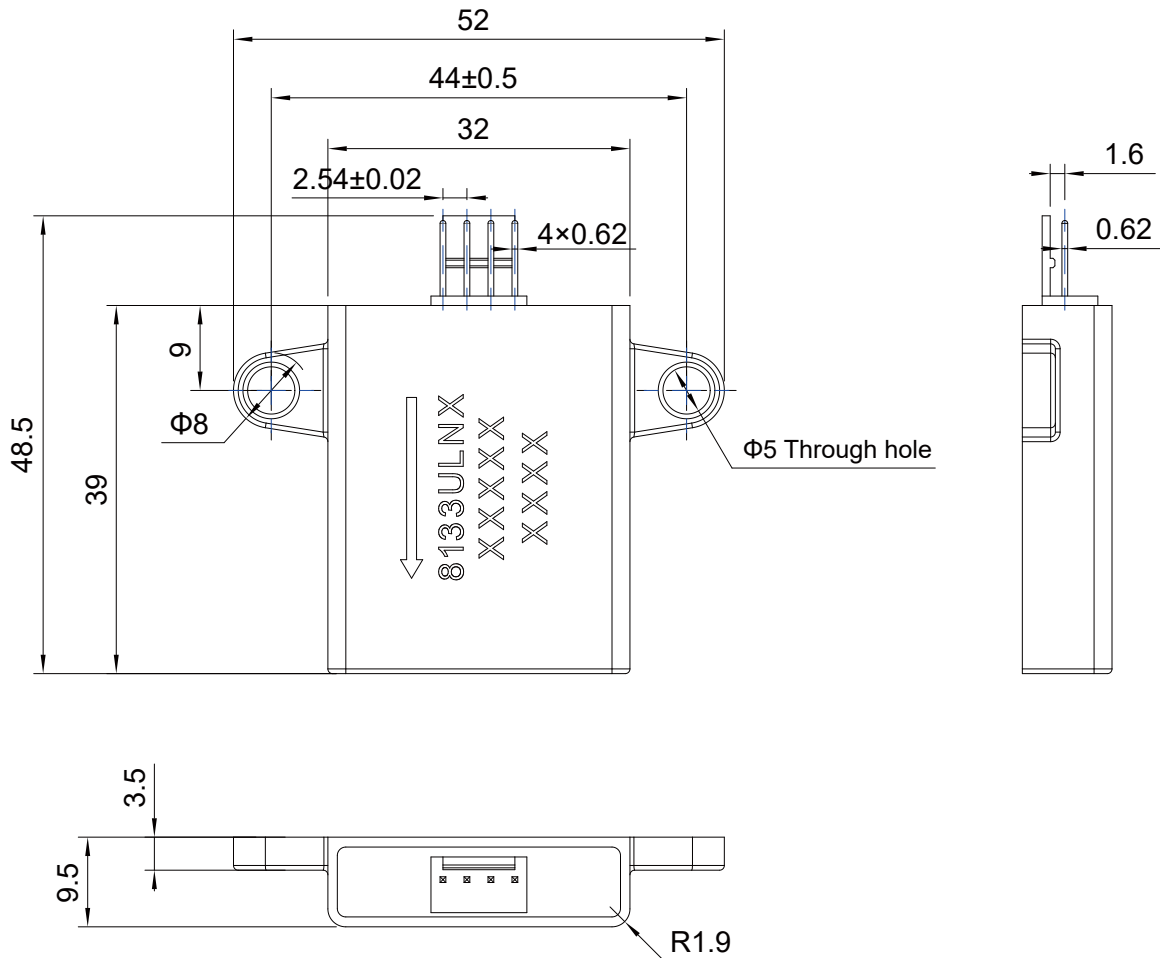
TMR-FMD8133ULN Outline Dimensions (Unit: mm)
